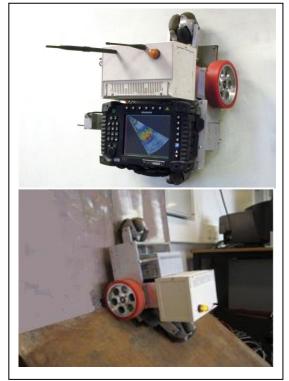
The CROCELLS wall climbing robots performing both welding and weld inspection
